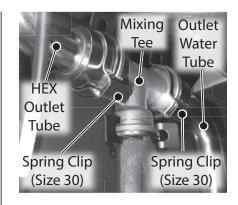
Remove spring clips from HEX outlet tube and outlet water tube
